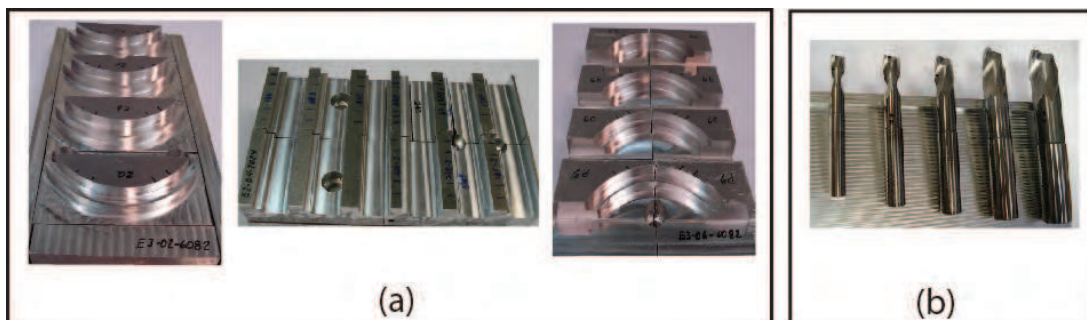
a) Aluminium workpieces and geometries. b) Cutting tools for the experimentation.
